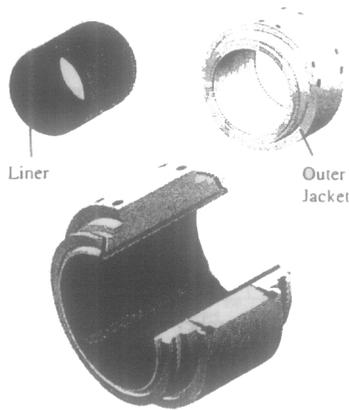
Subscale chamber segment manufactured by soldering technique
